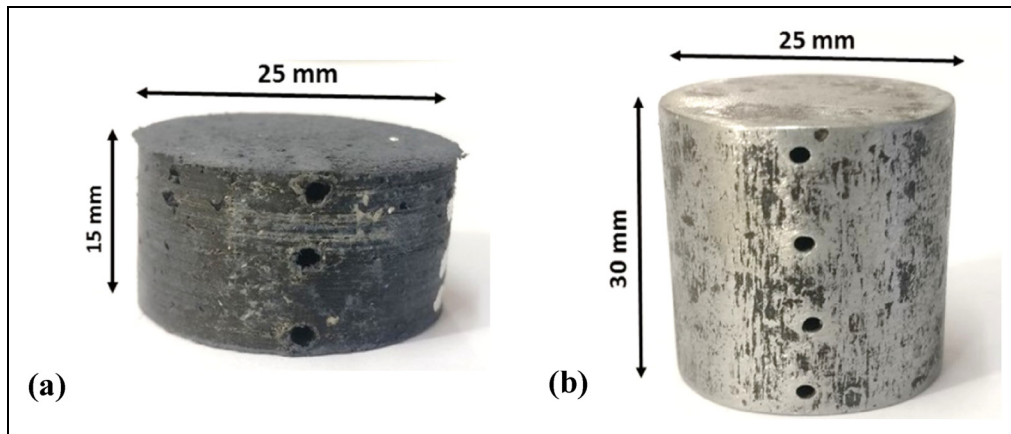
Pictorial view: (a) waste tire rubber/polypropylene (WTR/PP) solid blend; (b) H-13 tool steel specimen.
